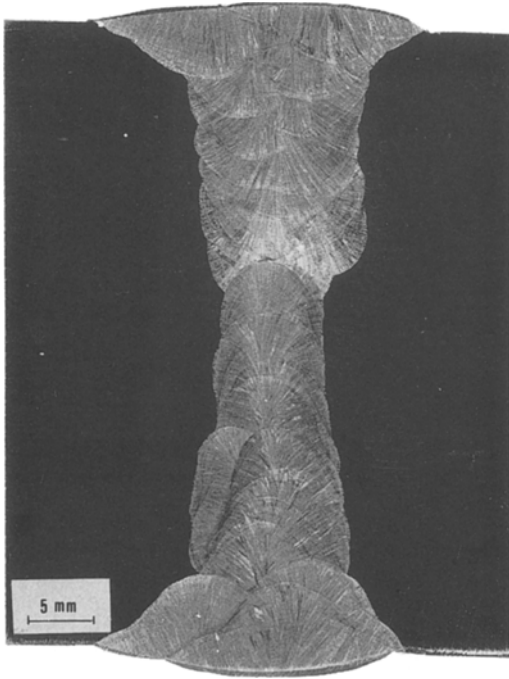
Macrograph of an (etched) cross-section of the Type 316 weld showing as-deposited weld metal geometry and solidification macrostructure.
